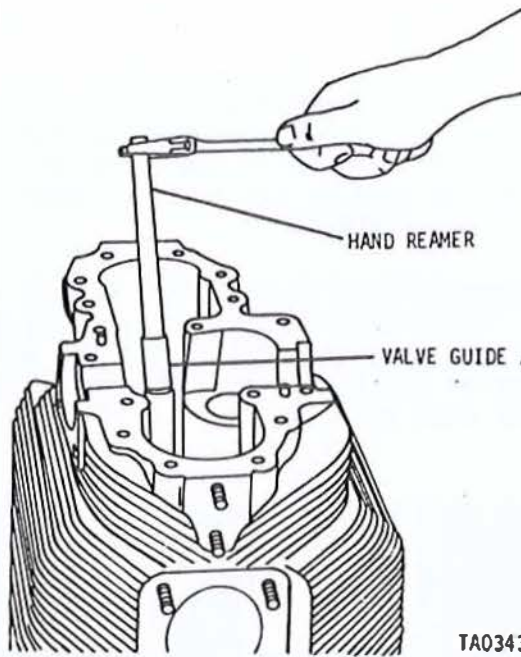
Intake valve guide hand reamer bushing positioning in cylinder head - sectional view
